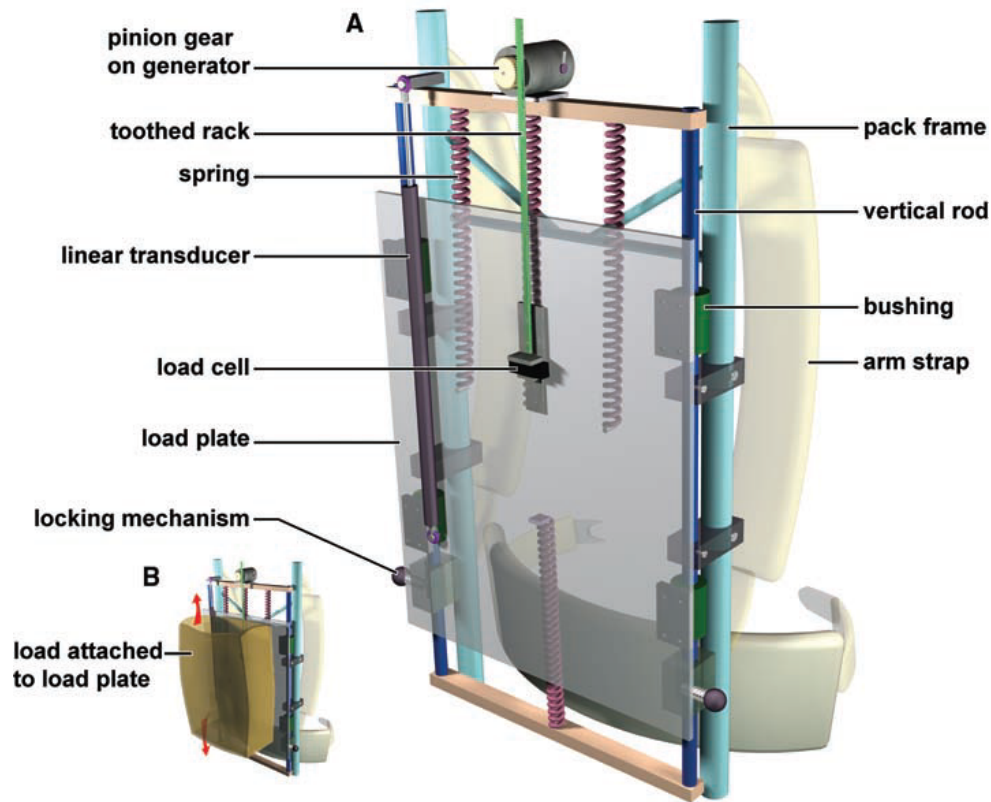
Backpack mounted on vertical slides with a rotary electric generator [9]
